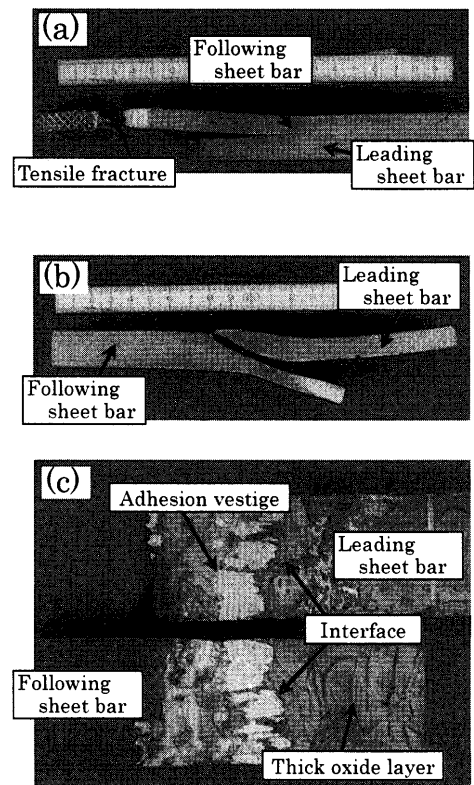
Tensile test piece after tensile test. (a) Side view of Sample A, (b) side view of Sample B, (c) interfaces of Sample B.
